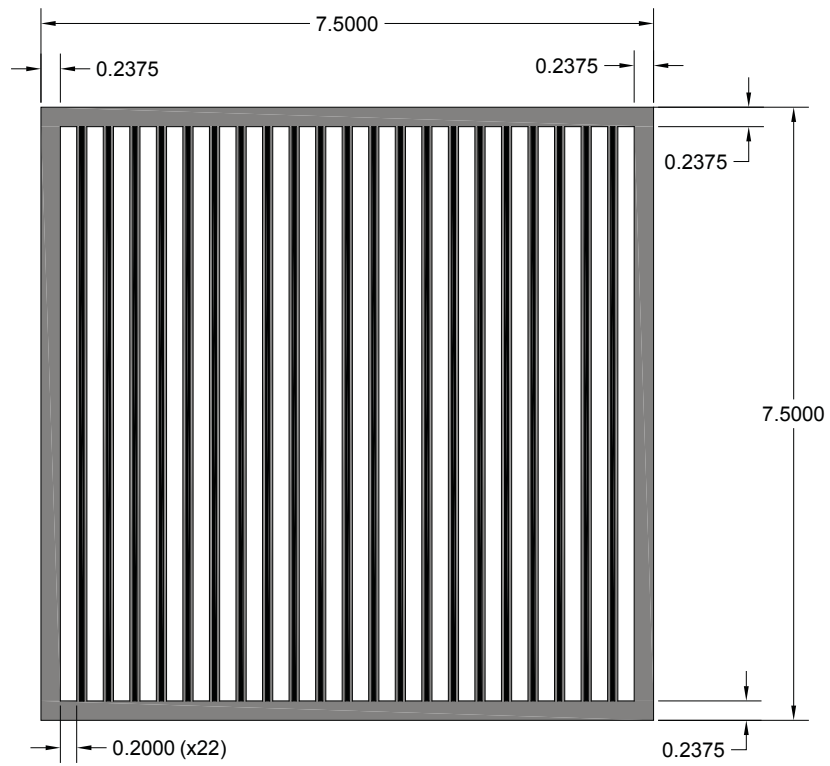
Cutaway of square fuel assembly with 21 fuel plates (dimensions in cm).
